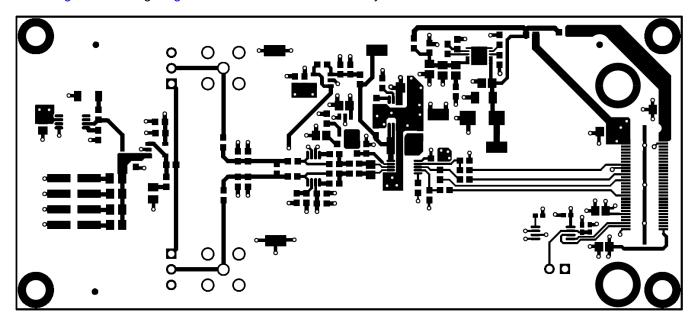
ADS8881EVMV2 PCB Layer 1: Top Layer
